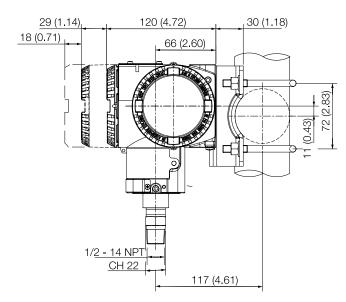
Dimensions - Barrel housing – 1/2 NPT female thread
